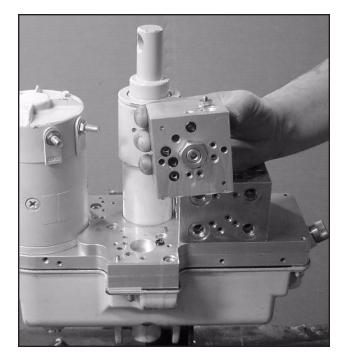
Remove the Universal Valve Block Assembly from the Base Plate. Note: There a five o-rings between the block and the plate.
